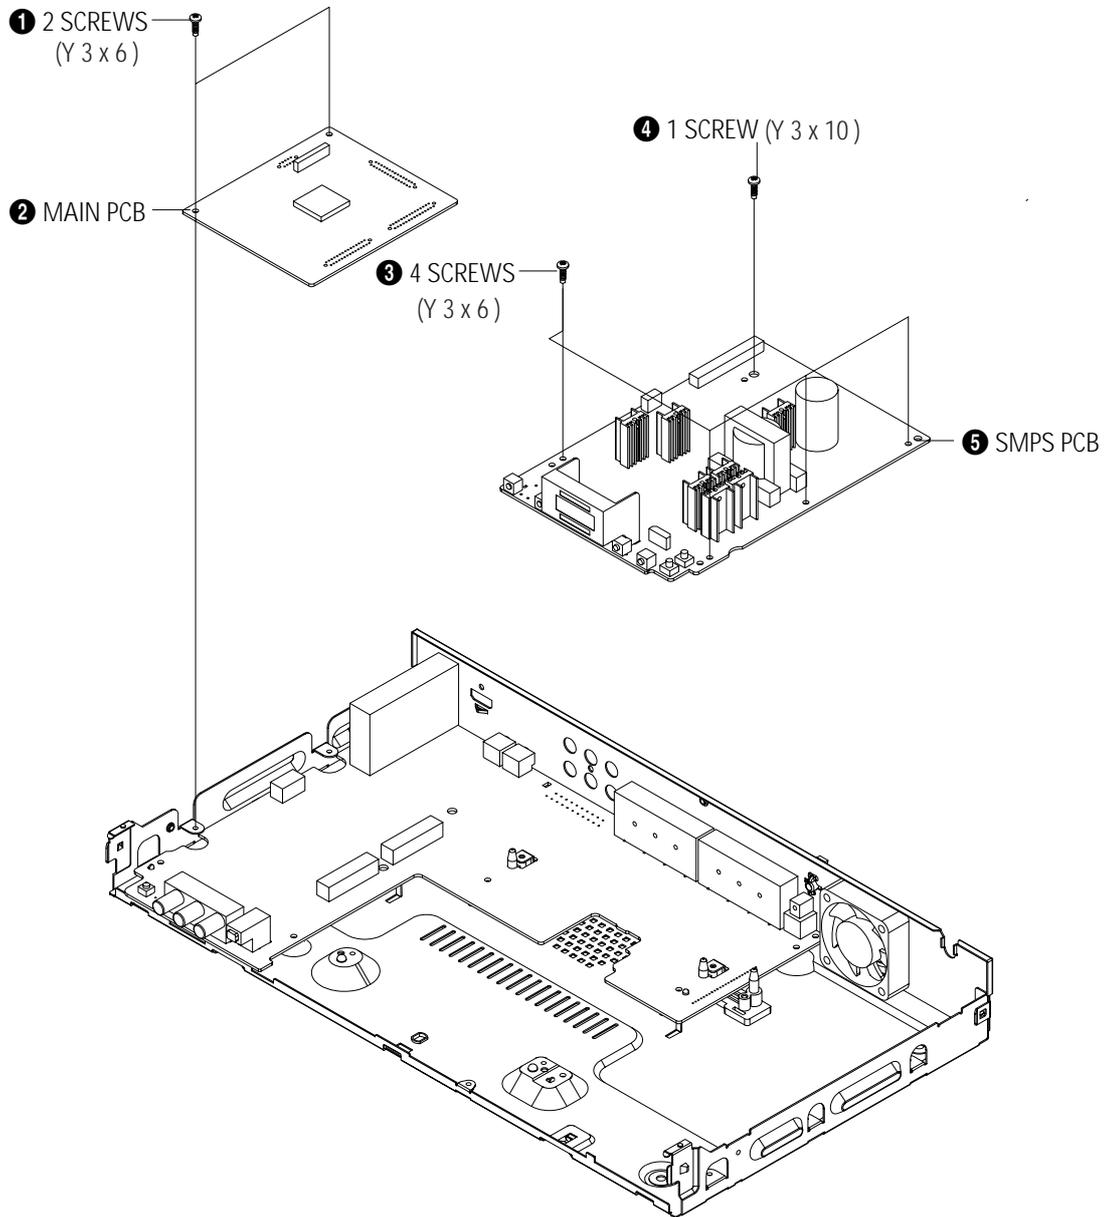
Main PCB and S.M.P.S. PCB Removal
